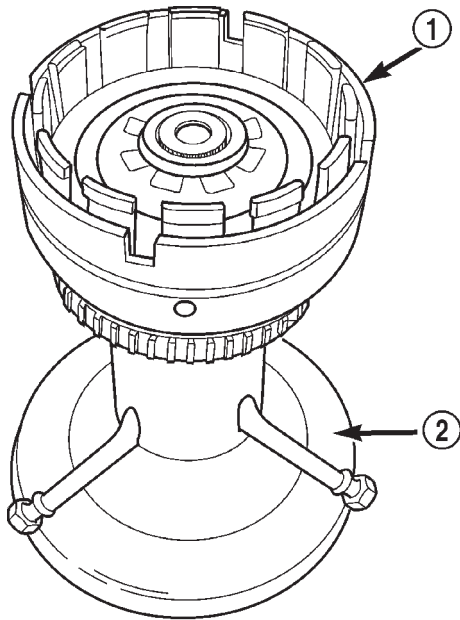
Input Clutch Assembly Mounted on Tool 8260
